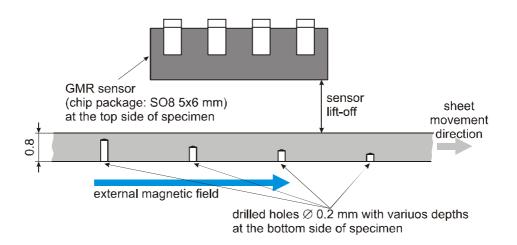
Arrangement of the sensor and the test specimen: detection of non-metallic inclusions (here: drilled holes as artificial defects) in cold rolled strips.
